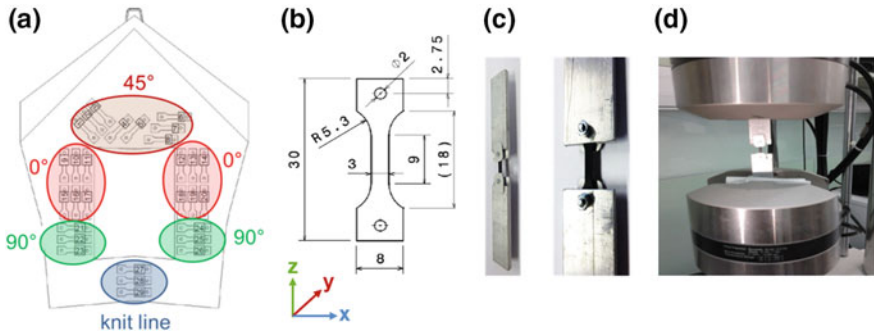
Places of sampling of the “mini” specimen (a), dimensions of all “mini” specimen (b), fixing device for these specimen types (c), mounted “mini” specimen between the testing machine grips (d)
